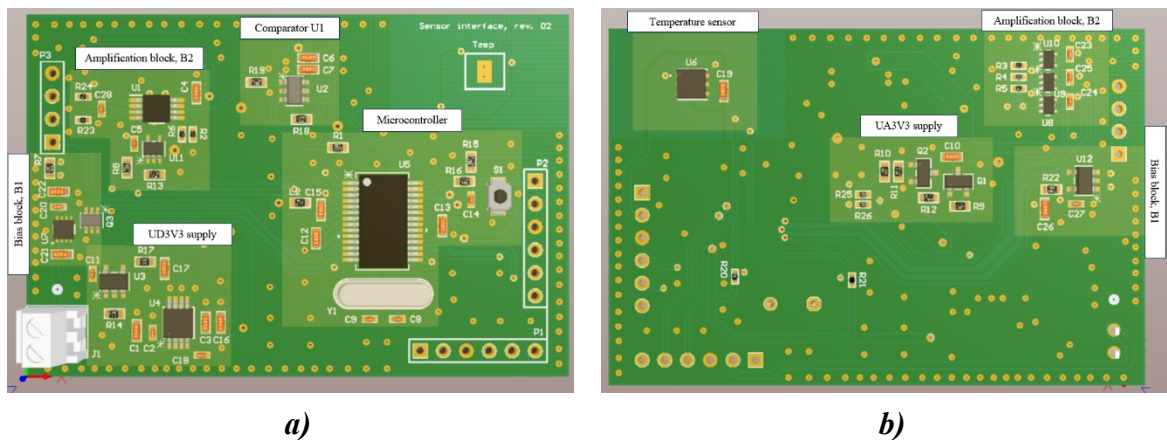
3D model of the PCB created for the optimized CSU system: a) Top Layer view, b) Bottom Layer view
